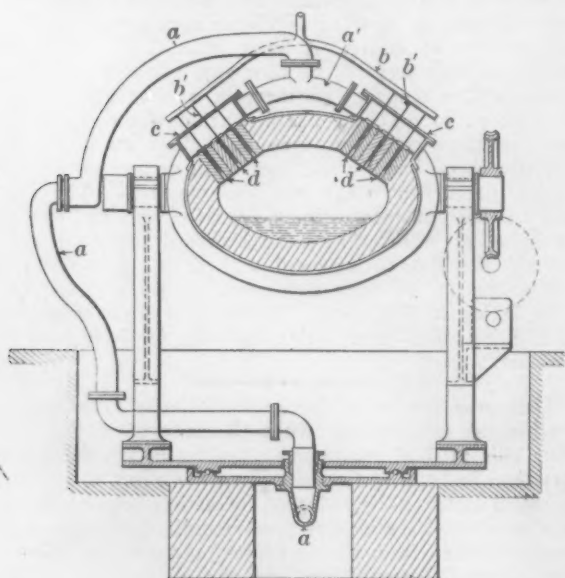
Section of Stock Converter, Showing Blast and Oil Pipes and Oil Jets for Melting
